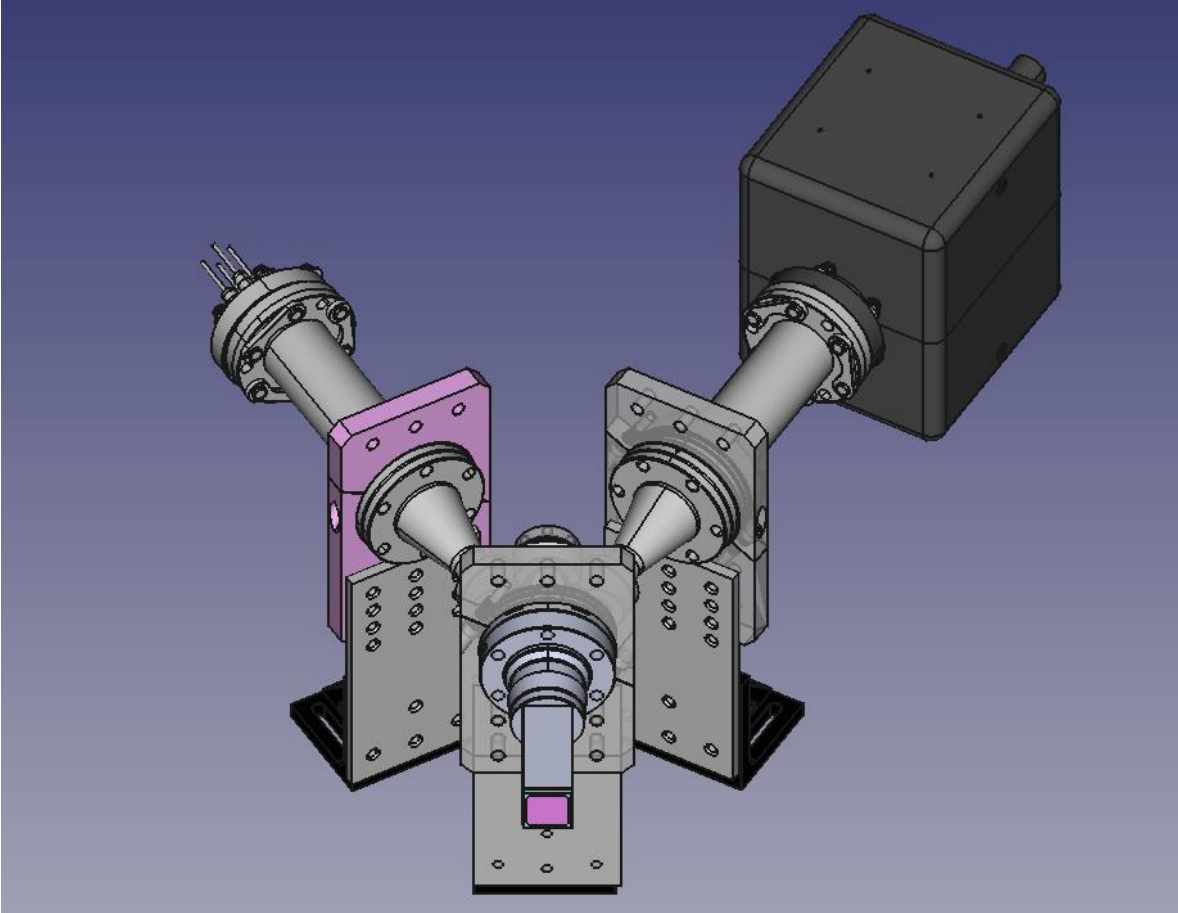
3D model of the vacuum system layout consisting of the vacuum glass cell, Conflat flanges, tubes and cone adapters, flange multiplexer, vacuum feedthrough and ion pump.
